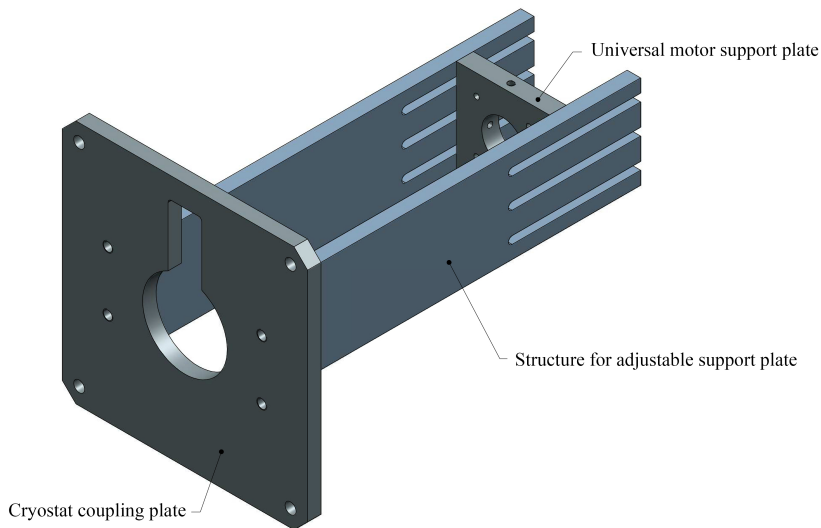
3D diagram of the motor assembly, parts are labeled.
